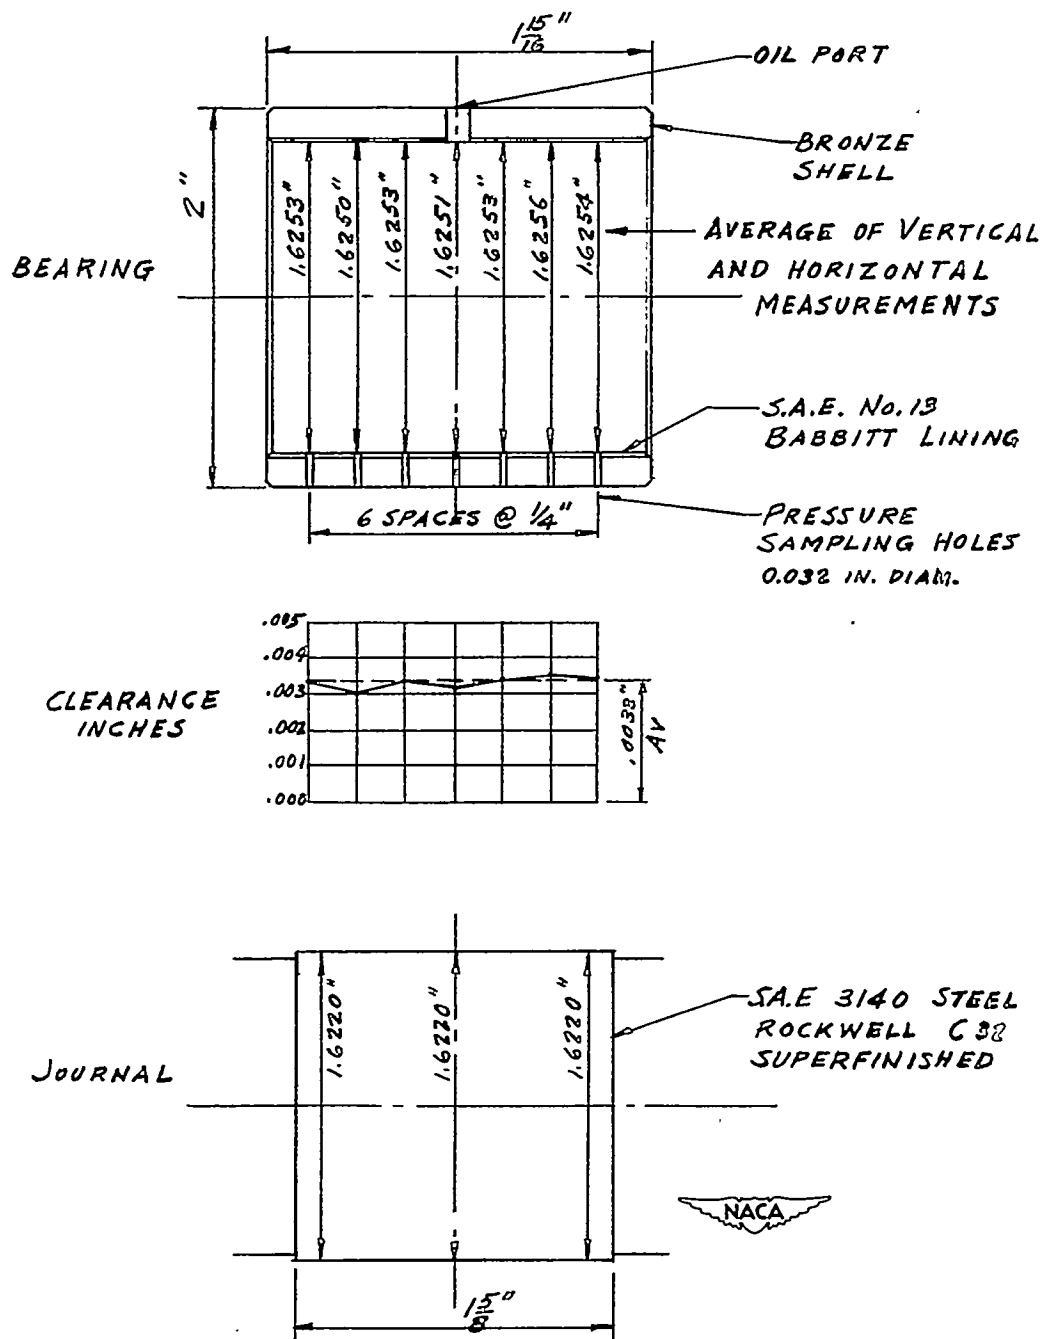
Dimensions and clearance of test bearing 2 and test journal 2.
